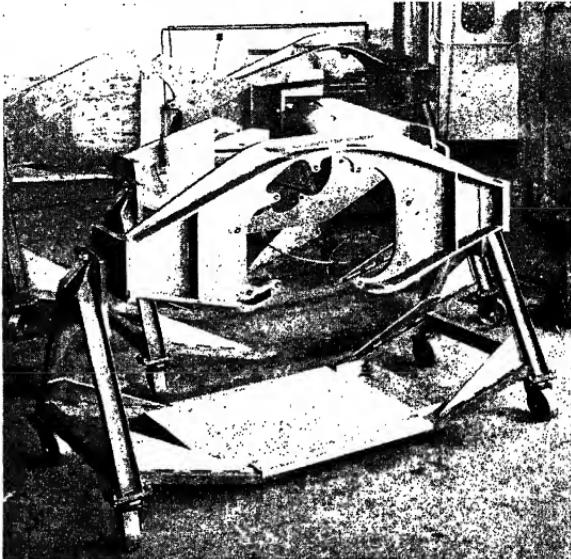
Fixture for holding engine mounts during welding. (*Courtesy of The Lincoln Electric Company.*)
